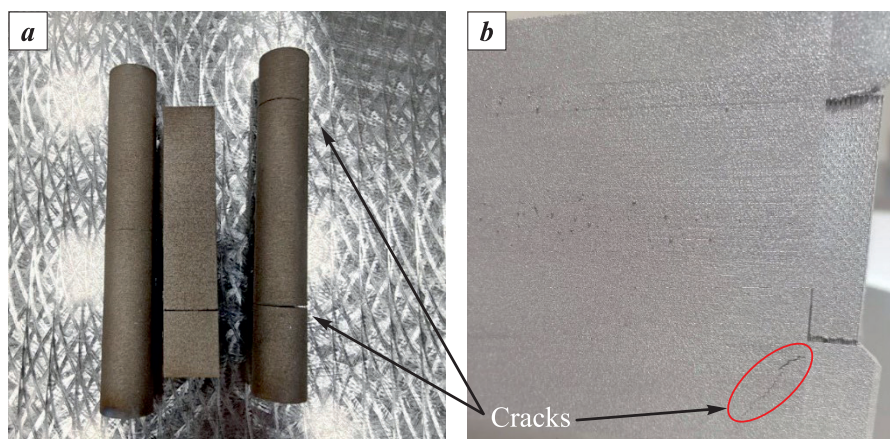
Appearance of surface defects in a VT6 witness samples (a) and in a VT20 workpiece (b)
